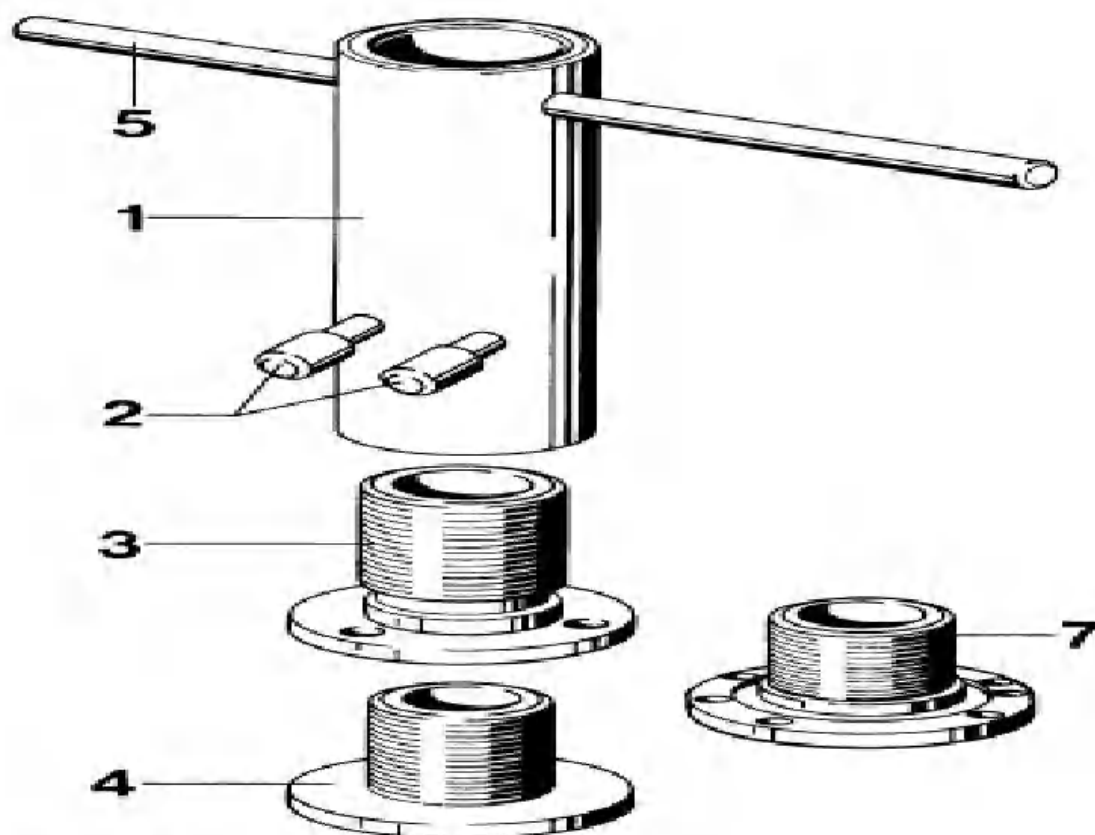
Identifying Special Tools 23 0 490 Extractor
